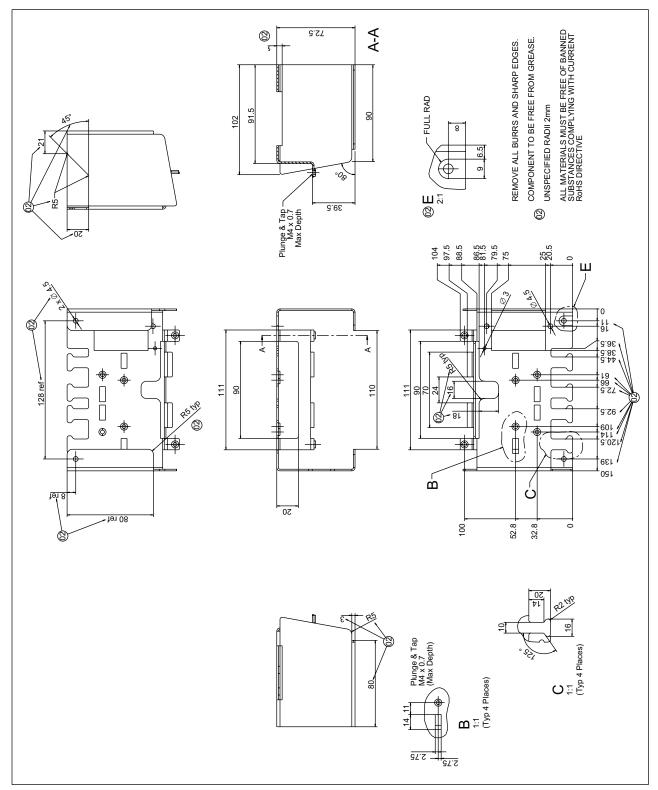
Dimension drawing: Screening Kit, frame size FSB
